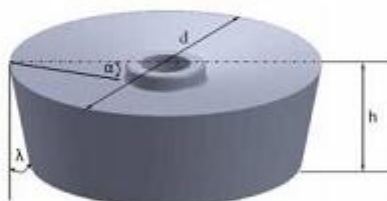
Tool geometry model (d =tool diameter, h =tool thickness, α =rake angle, λ =clearance angle)
